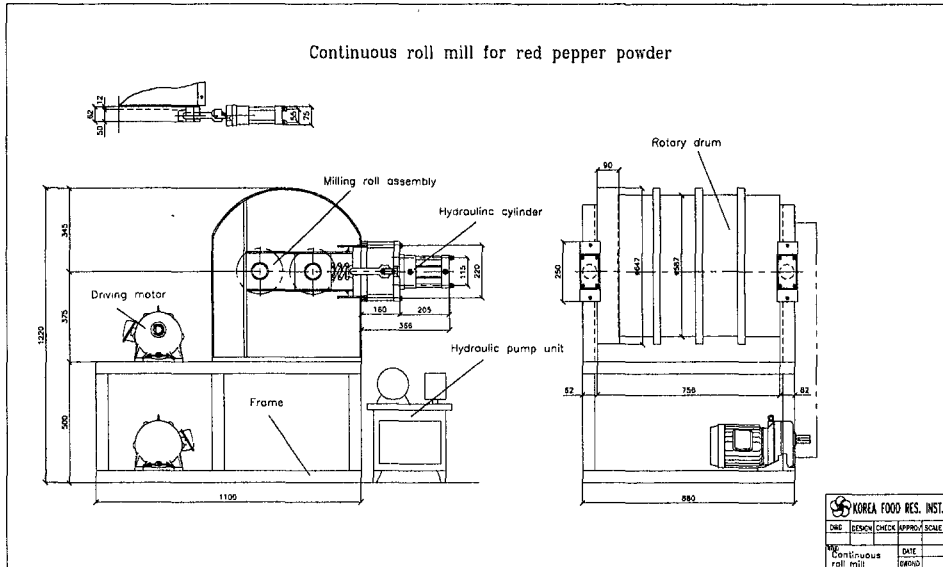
Prototype of continuous roll mill for red pepper powder
